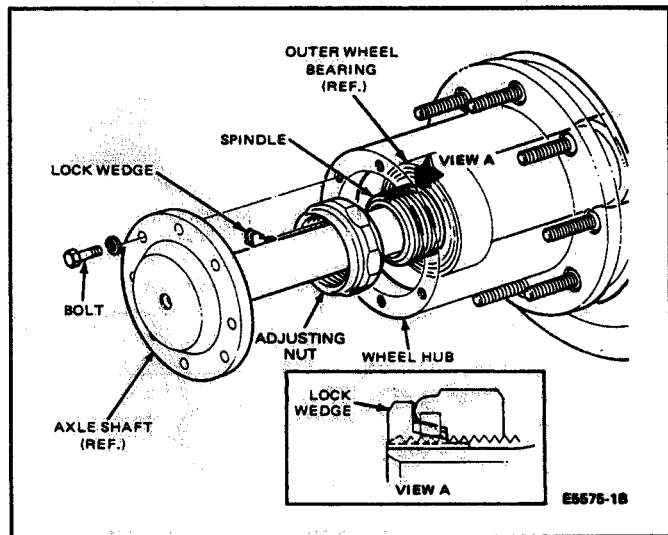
Positioning Locking Wedge—E-350 and F-350
